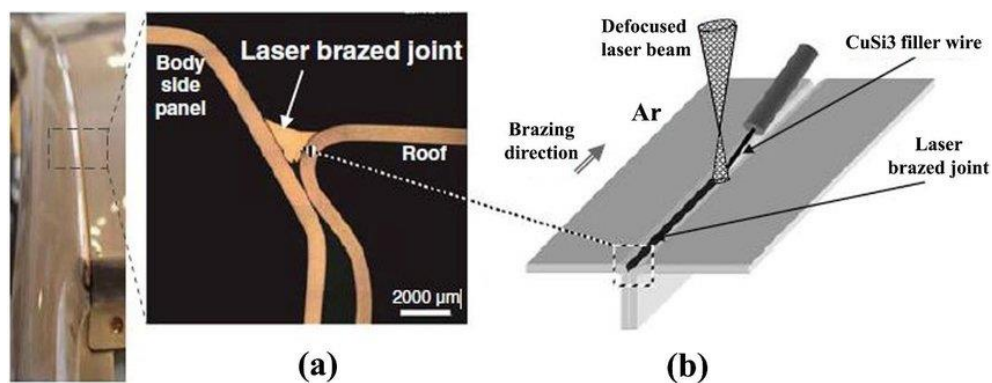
Laser brazed joint in the automotive industry: a) joints cross section view of the laser brazed welds of roof/body side panel; b) a schematic illustrating the principle of laser brazing [205].
